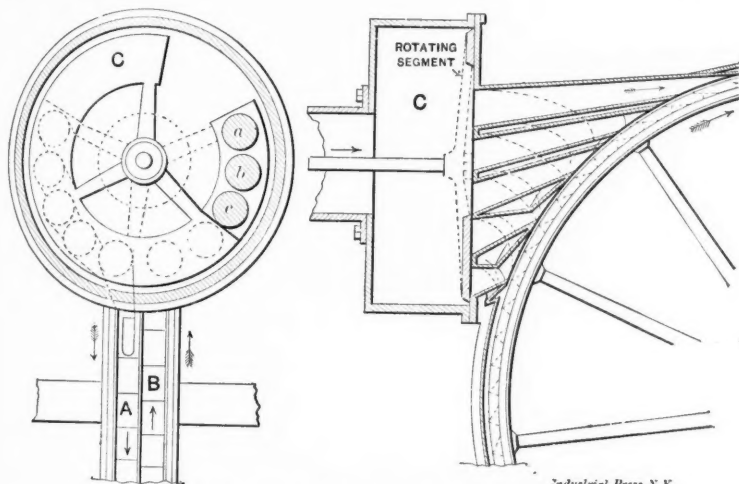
Pilbrow's Reversing with Valve for Controlling Nozzles
